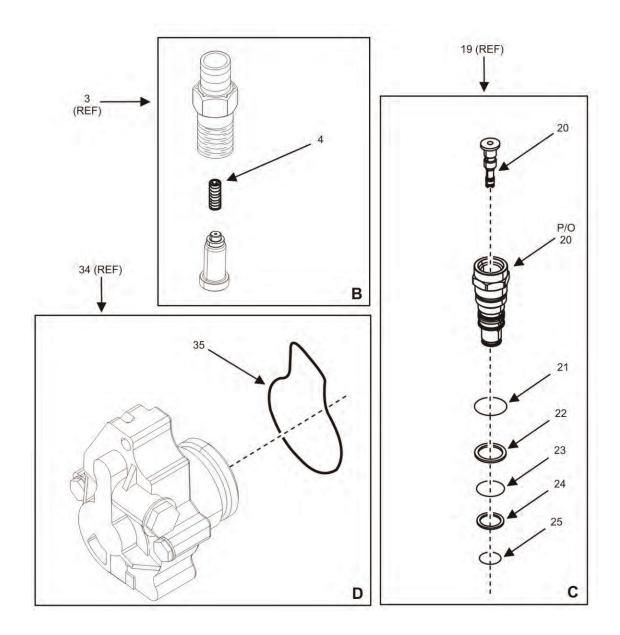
Fuel Injection Pump (Sheet 3 of 4).
